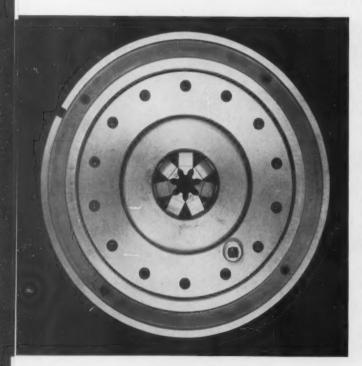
Seven formed cutter blades, assembled radially in a cutter fixture on machine seen in Fig. 2, are fed inward to form spaces between adjoining teeth of gears.
